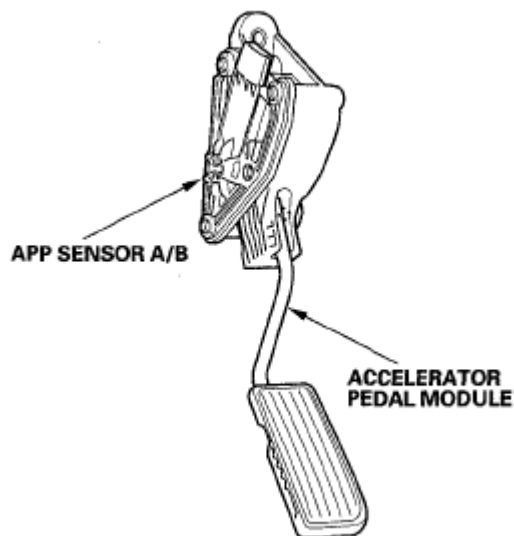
Identifying Accelerator Pedal Module And APP Sensor A/B
